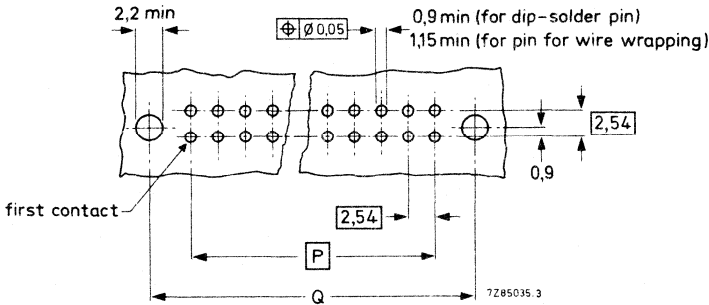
Hole pattern for male headers with straight dip-solder pins or straight pins for wire wrapping; for dimensions P and Q, see Table 10. Fixing of the male headers can be done by means of M2 screws and nuts. Mounting is only possible when the clamp/ejectors are not inserted.
